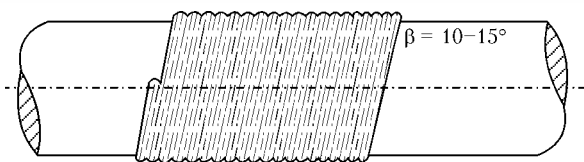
Hardfacing installation on the base of machine RM 461E
